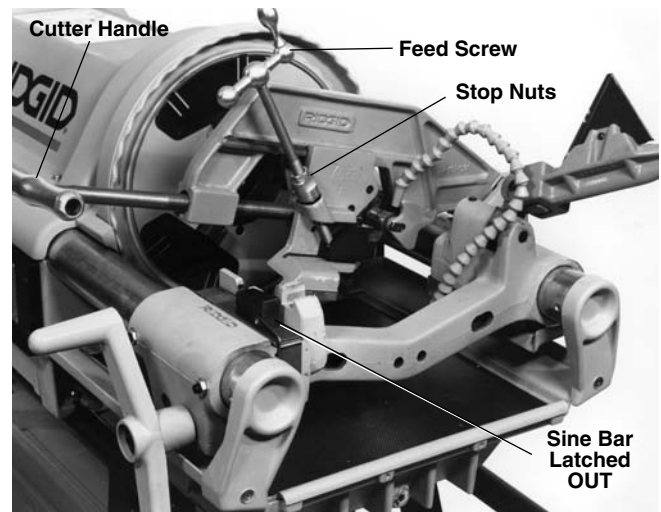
No. 766 Saran Cutter Installed. (Shown with Die Head Removed for Illustration Only.) Die Head MUST be Installed and in UP Position During Use of 766 Cutter
